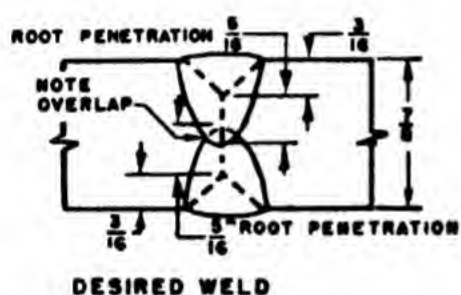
Designation of size of groove welds with specified root penetration.
